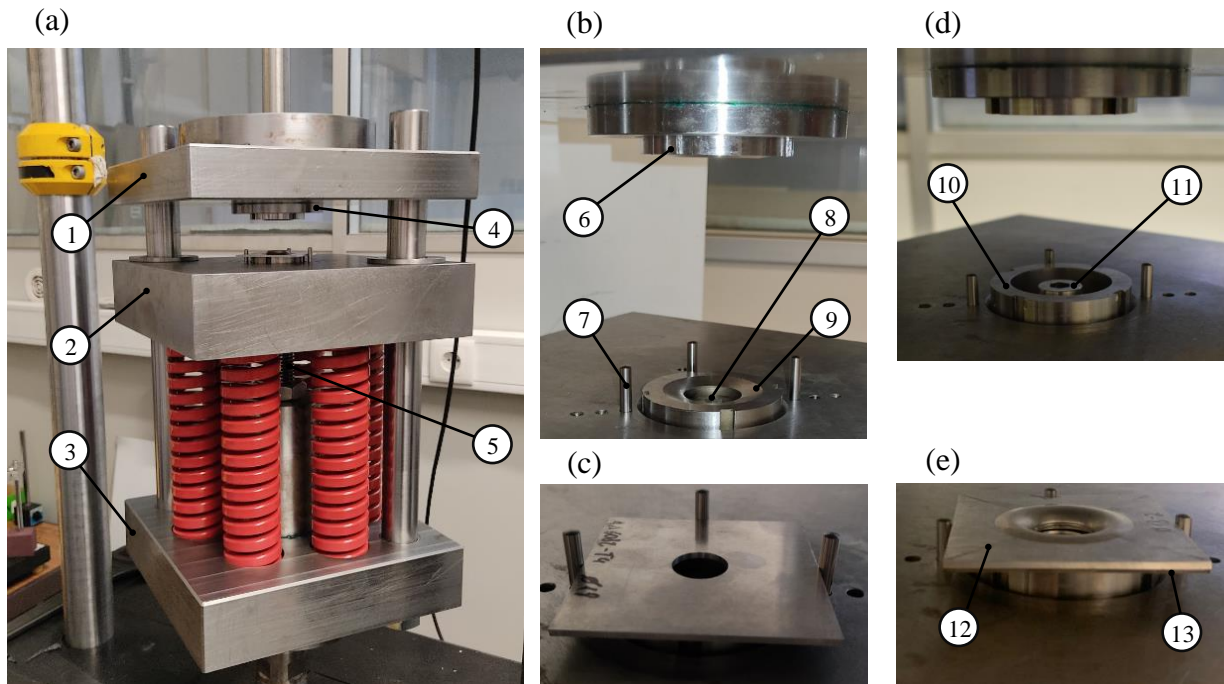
Hole hemming experimental tests: (a) Hole hemming tool, (b) flanging stage tool components, (c) positioning of the outer sheet for the flanging stage, (d) hemming stage tool components and (e) positioning of the sheets for the hemming stage. 1 – upper plate, 2 – middle plate, 3 – bottom plate, 4 – die holder, 5 – punch holder, 6 – upper die, 7 – alignment pins, 8 – flanging punch, 9 – bottom die, 10 – blank holder, 11 – hemming punch, 12 – outer sheet and 13 – inner sheet.
